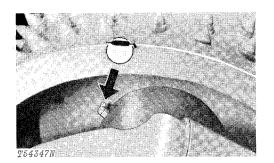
Feed Roll Final Drive Shaft Upper Bearing (2 Points) (Right Side Shown)
